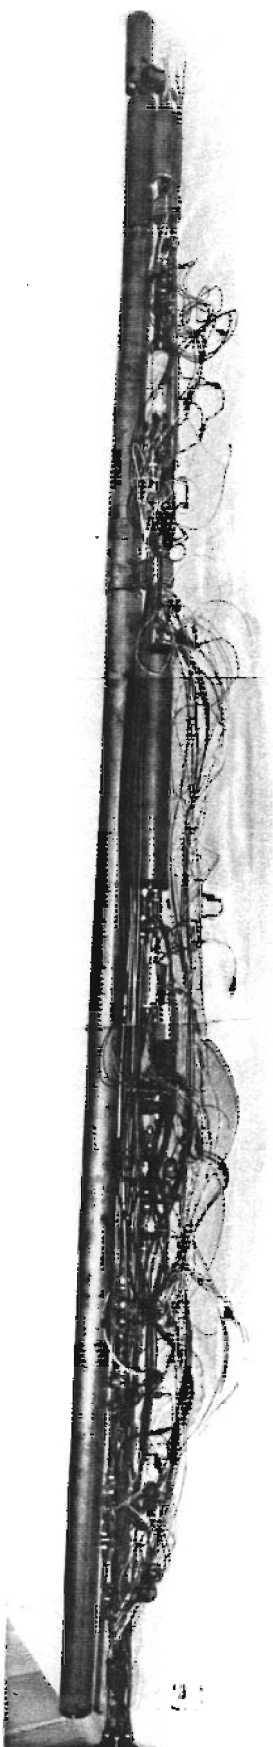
Photograph of the complete assembly prior to insertion in the canister body which is also shown
